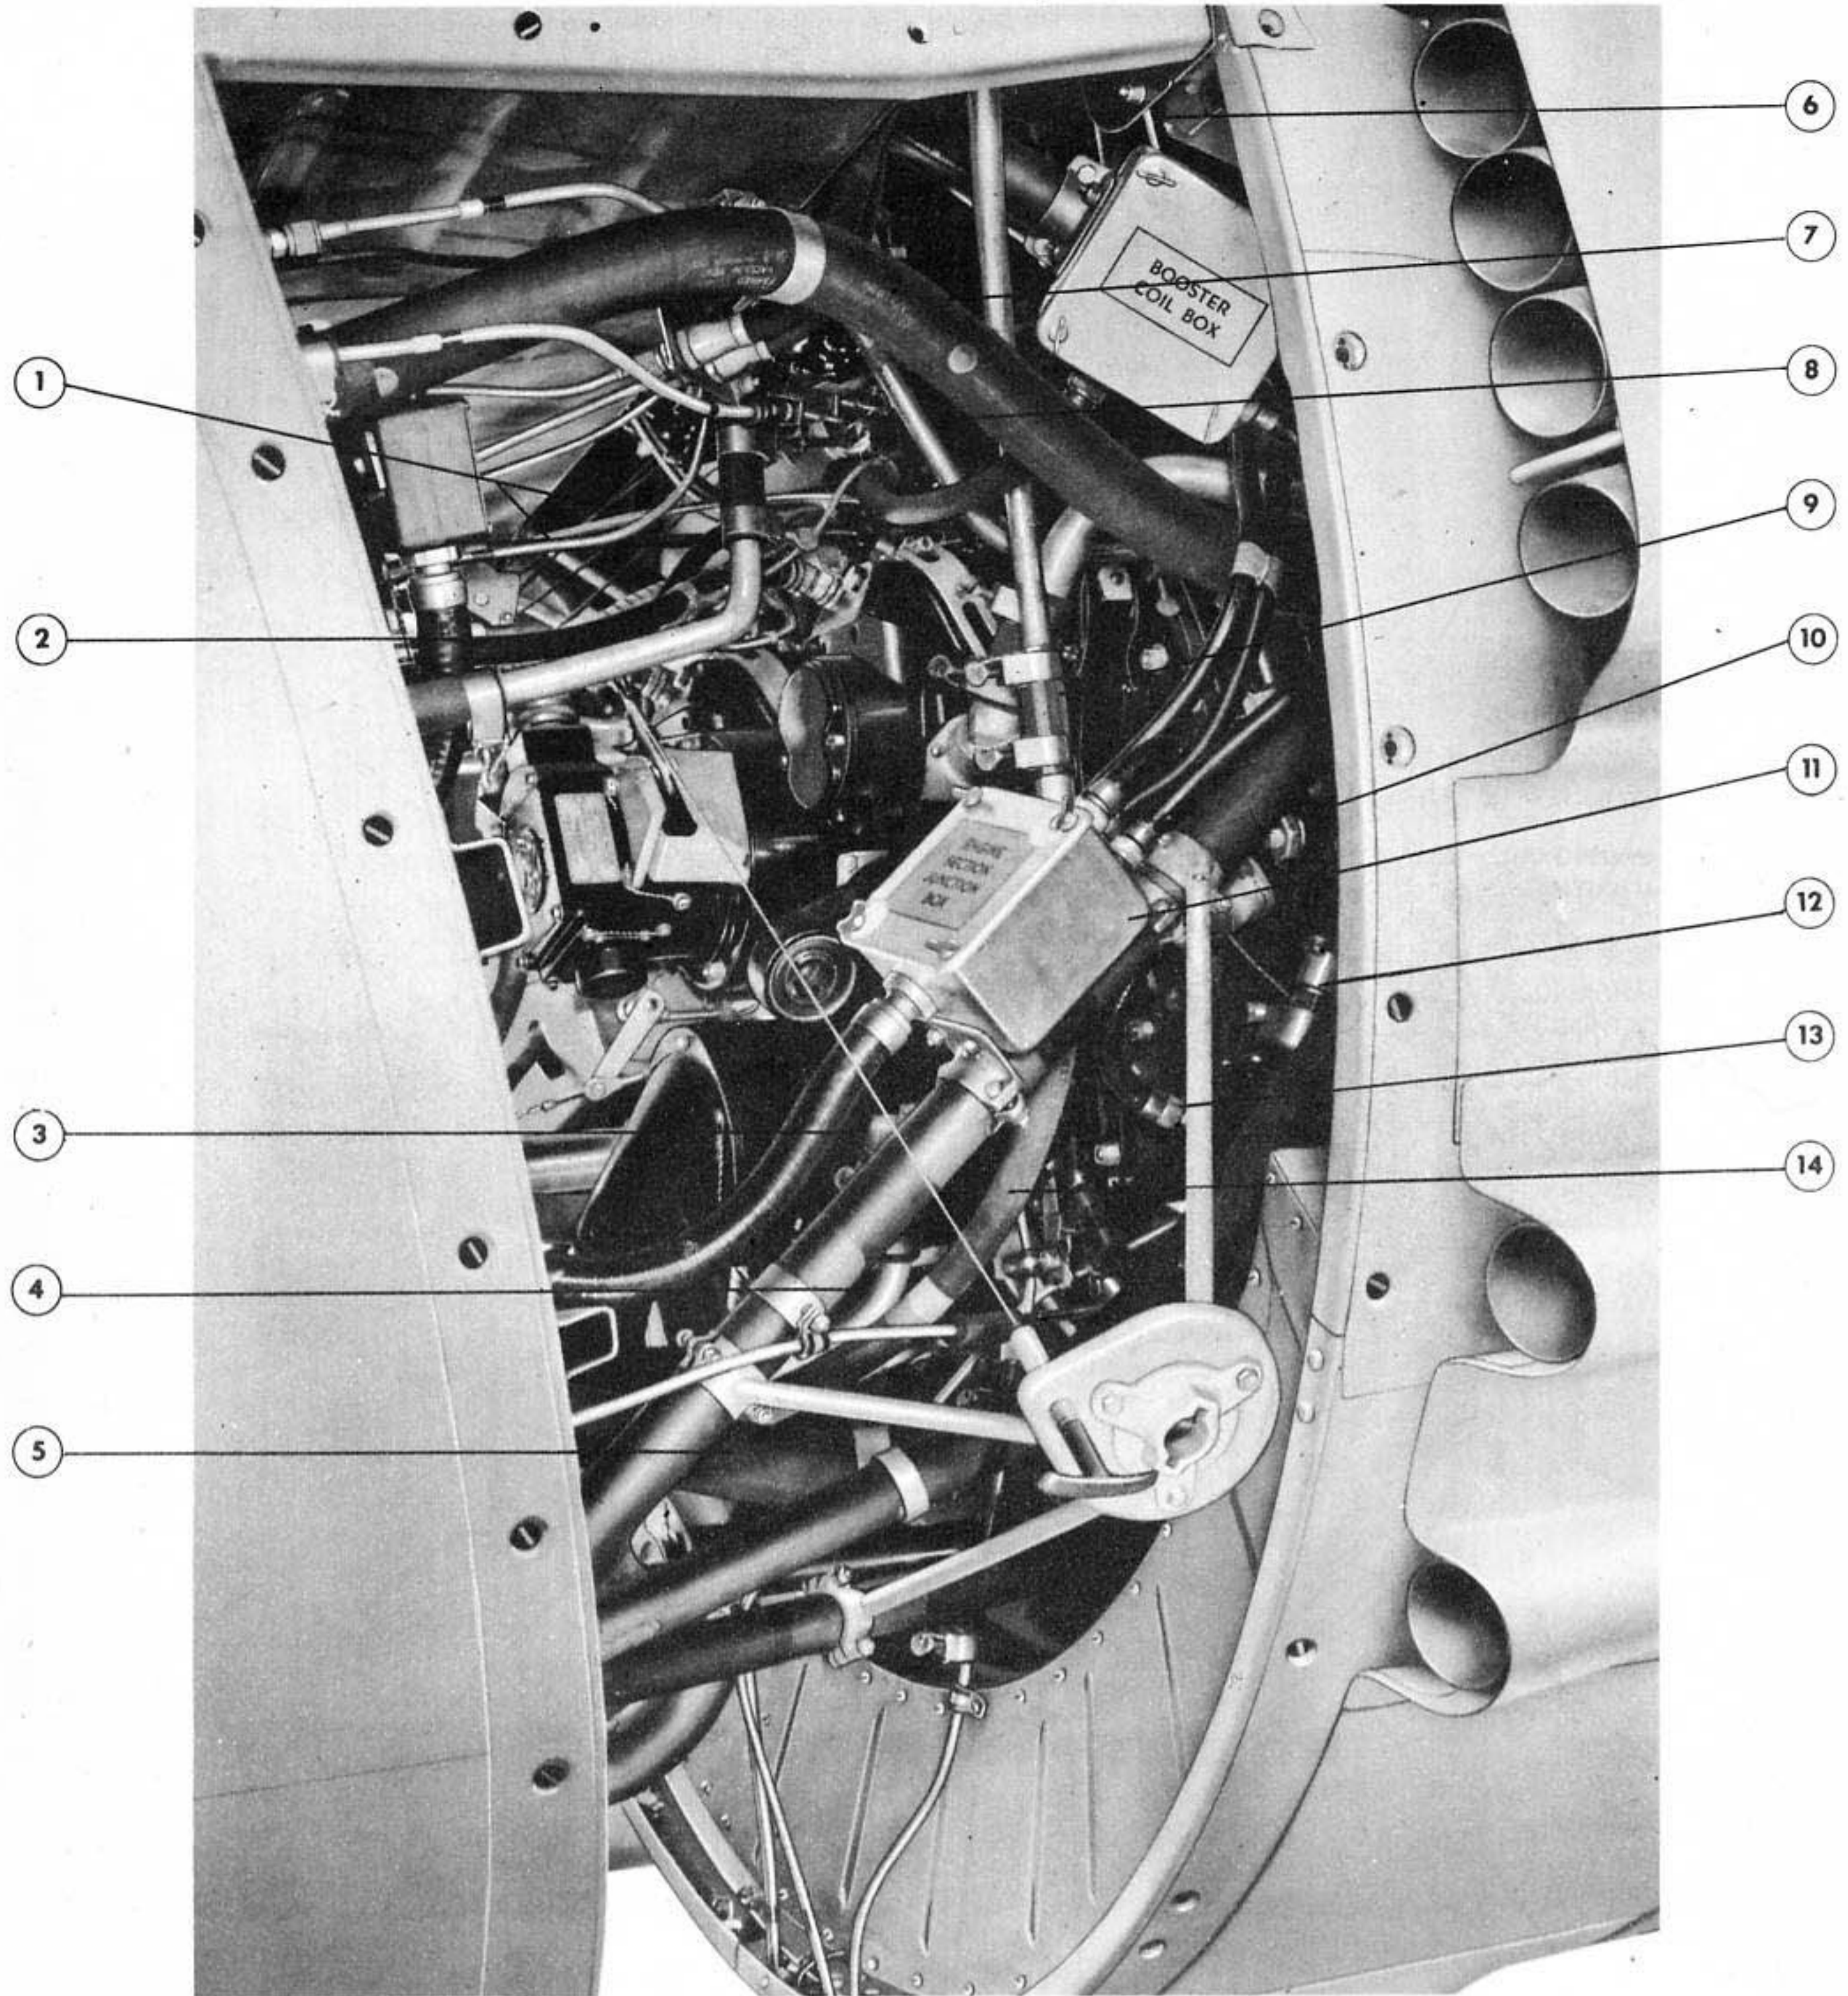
LEFT-HAND VIEW OF ENGINE ACCESSORY SECTION - COWLING REMOVED
